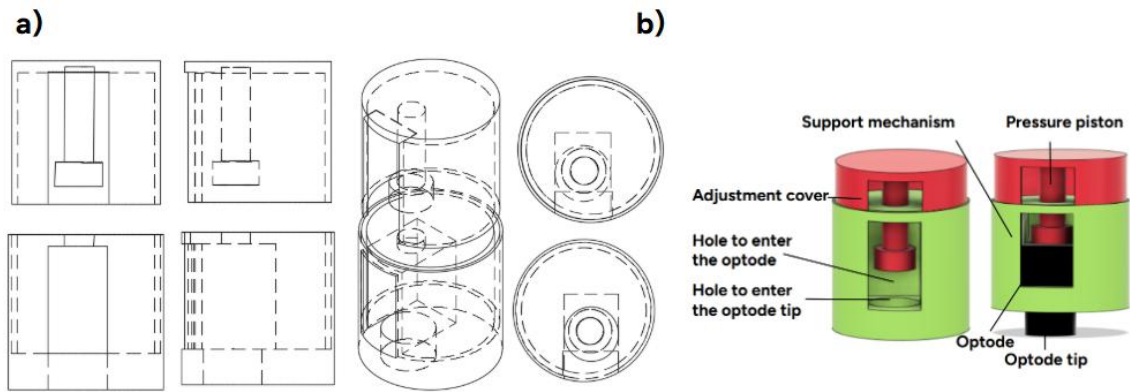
Design of the adjustable vertical pressure applicator. a) Sketch of the individual components b) 3D design generated in Autodesk Fusion 360 of the mechanism.
